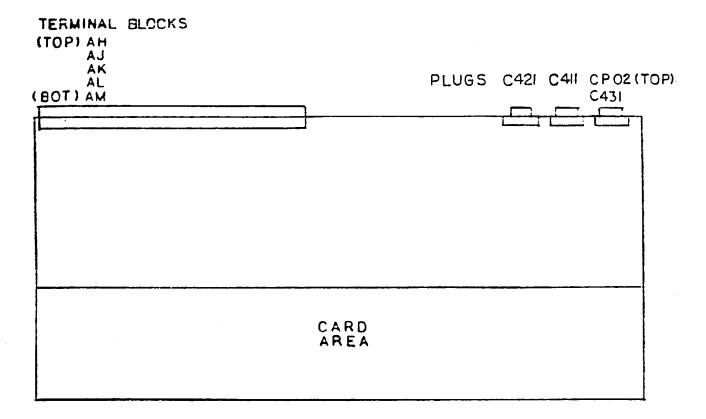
(0285A6220-0) Component and Printed Circuit Card Location Diagram for Type SLA56B Relay
